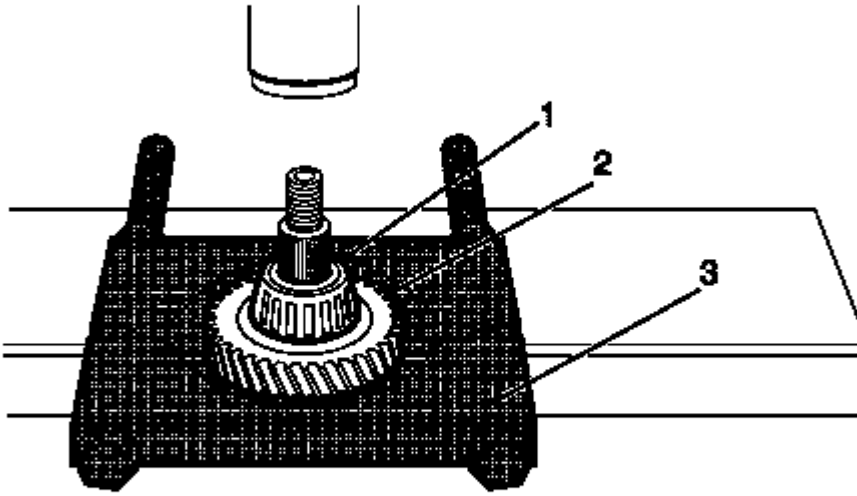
Counter Shaft Left Bearing And 4th Gear
